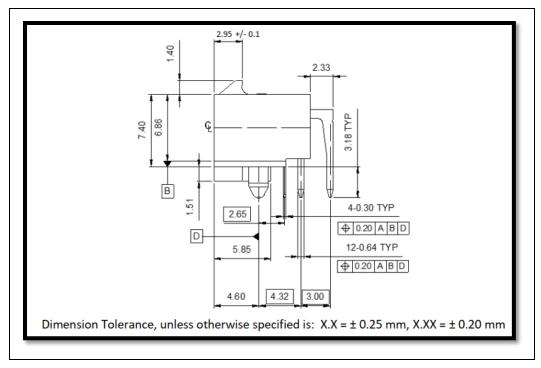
12V-2x6 PCB Header Dimensions - Front View
